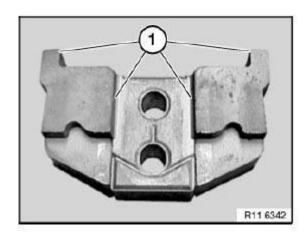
Identifying Contact Surface Courtesy of BMW OF NORTH AMERICA, INC.
